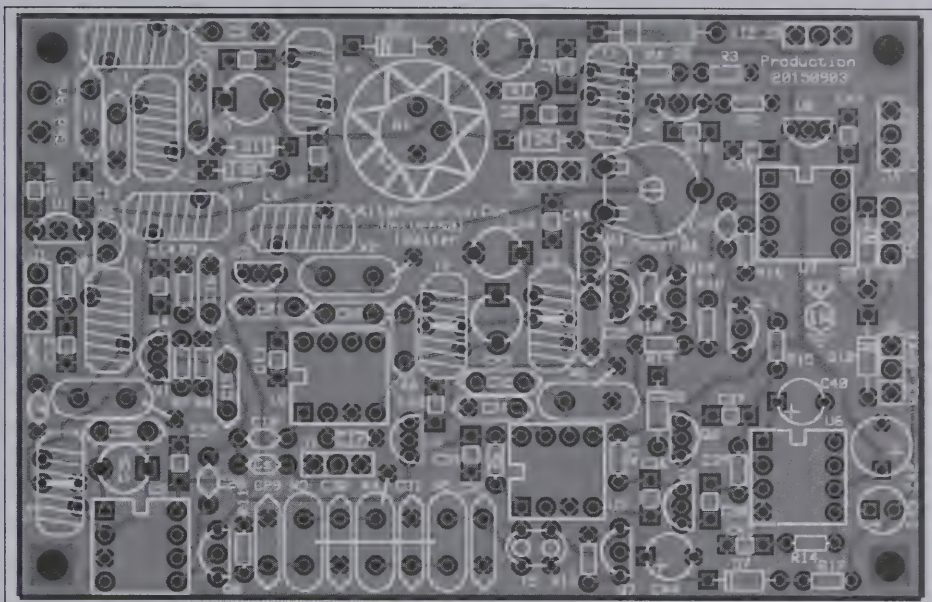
The unbuilt printed circuit board for the 1Watter. You can see the compact layout with a mix of SMT and through-hole components.
